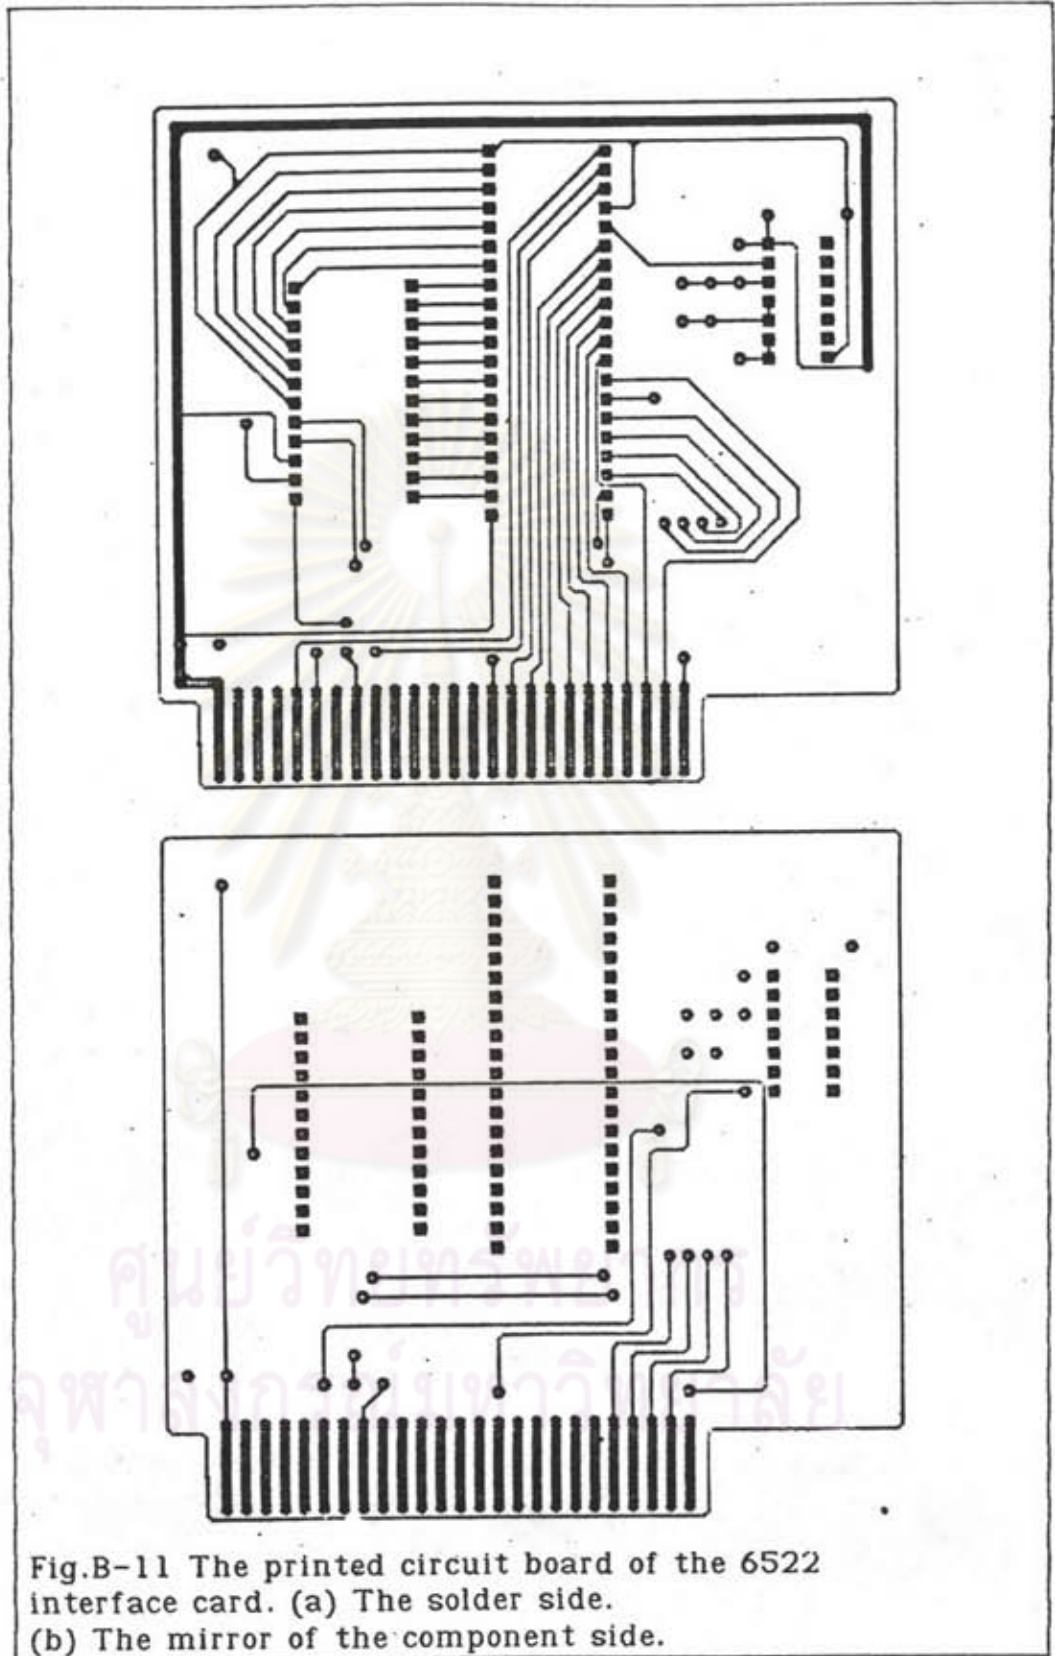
The printed circuit board of the 6522 interface card. (a) The solder side.
